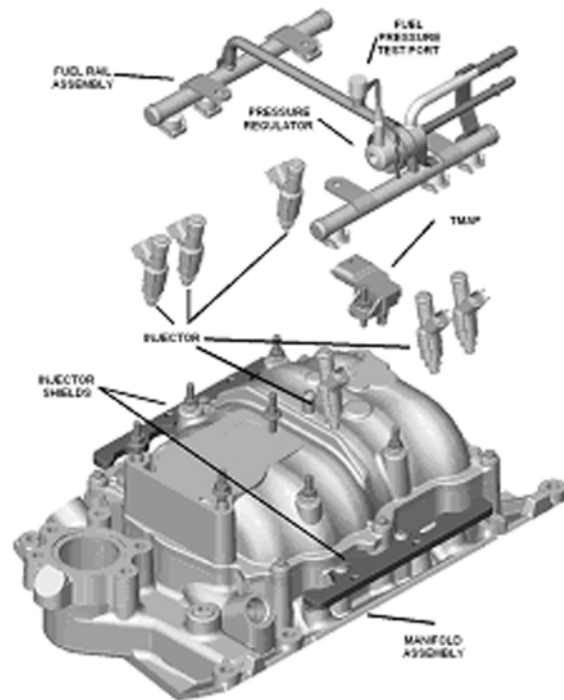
INJECTOR RAIL AND MANIFOLD
